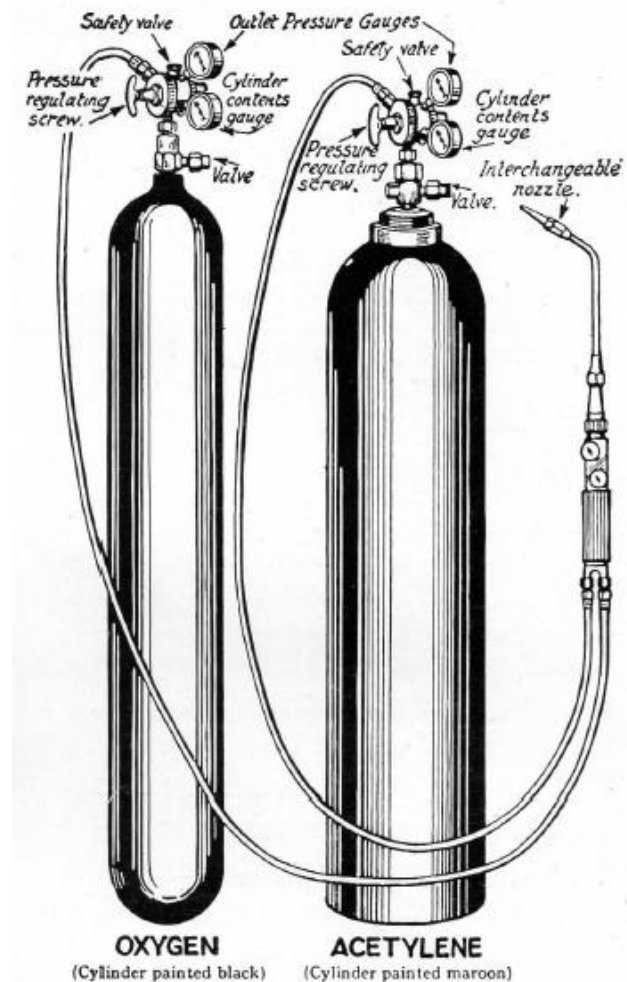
High pressure oxy-acetylene welding outfit.
